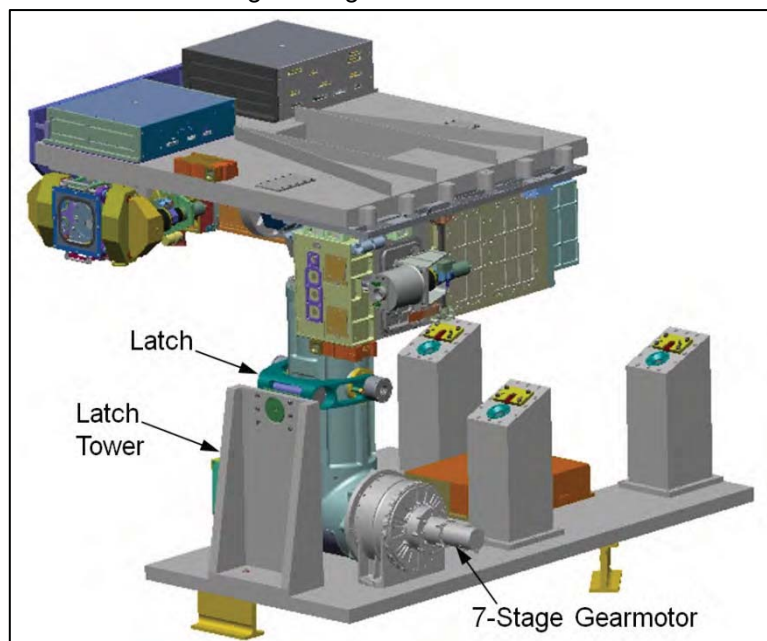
Deployment Mechanism Section View, Deployed Configuration
